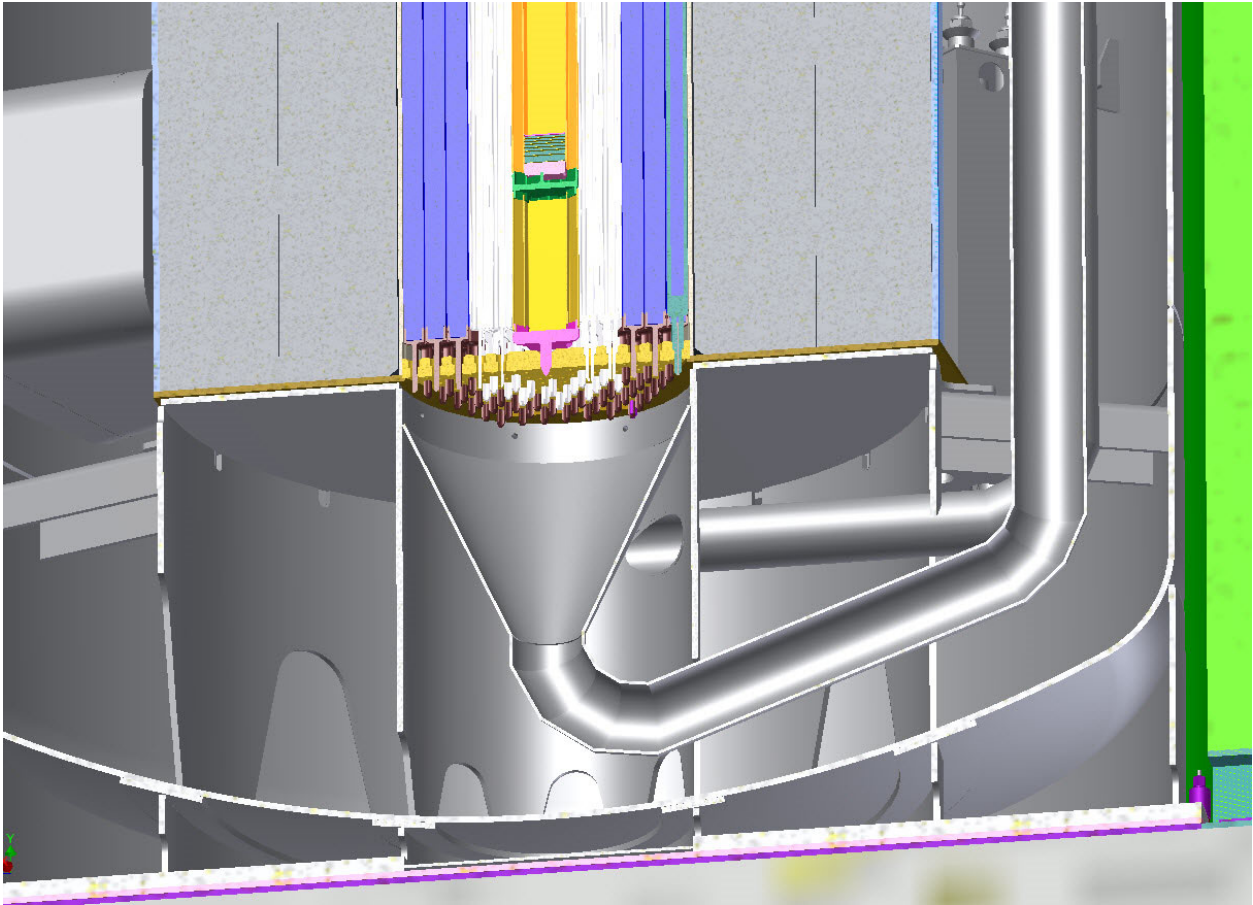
Section view of the lower part of the subcritical assembly tank showing the grid plate, the suction funnel, the water coolant pipe, and the return pipe. Return flow is diffused through eight cutouts in the inner support cylinder and eight cutouts in the outer support cylinder. Three cutouts are visible in the inner support cylinder and two are visible in the outer support cylinder in the figure. Swirling motion and the location of the cutouts at the bottom of the support cylinders prevent stagnation areas within the subcritical assembly tank.
